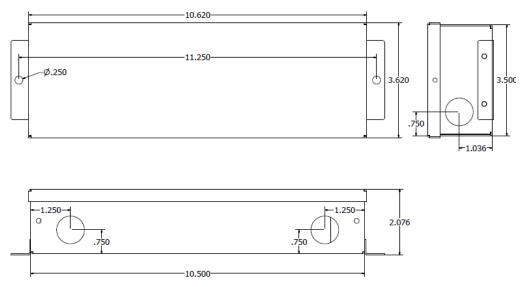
LD60-24DC-D10-UE mounting dimensions.
